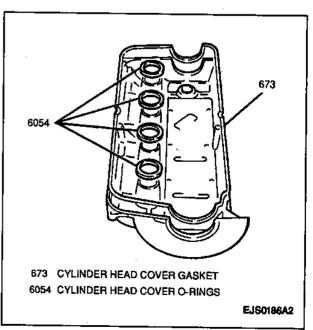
Cylinder Head Cover Gasket and O-Ring Installation
